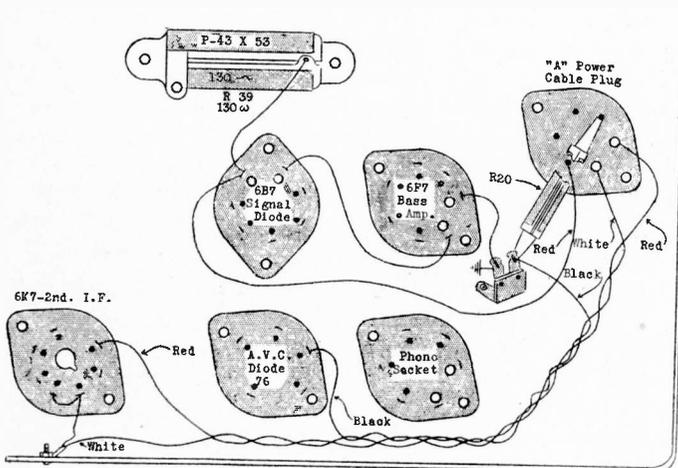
On the left is shown the tube sockets and cable plug of the radio-frequency chassis of the Wells-Gardner 6F Series with the revised heater wiring, as explained in the accompanying text
